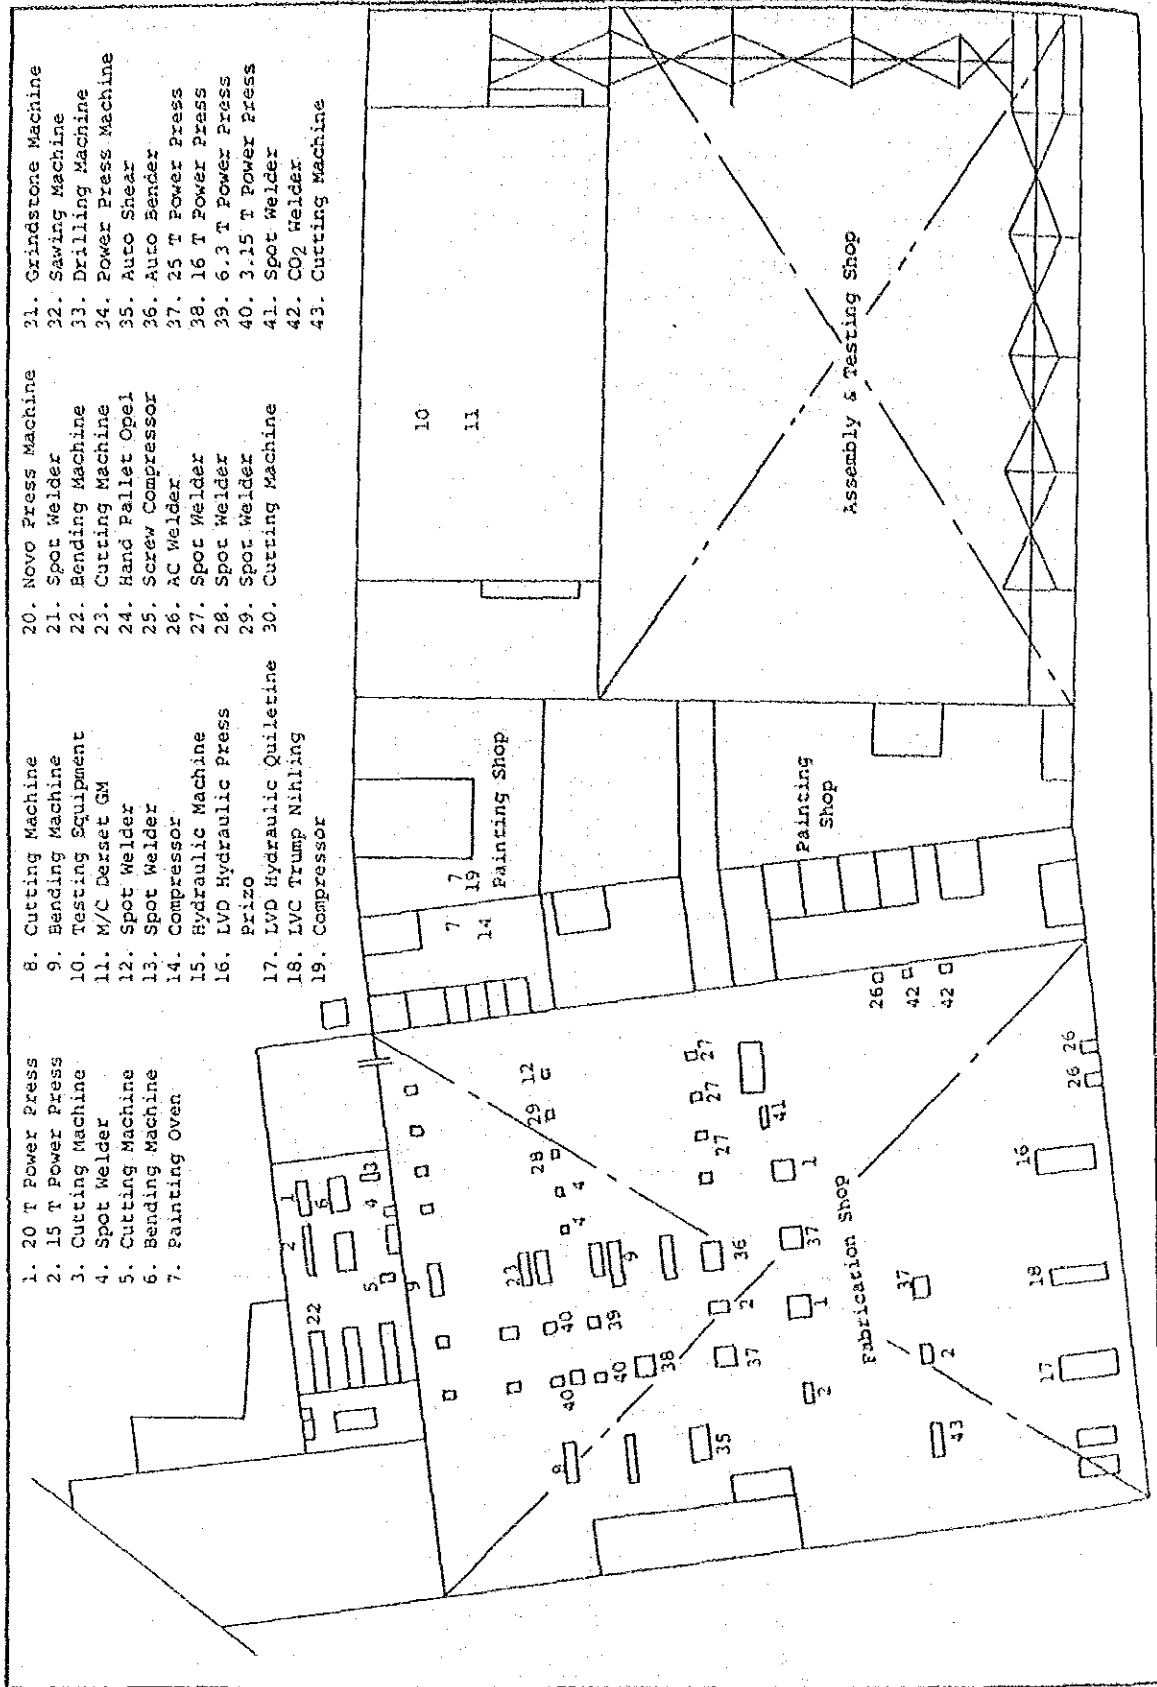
LAYOUT OF EXPANDED FACTORY OF MANUFACTURING SWITCHGEAR
